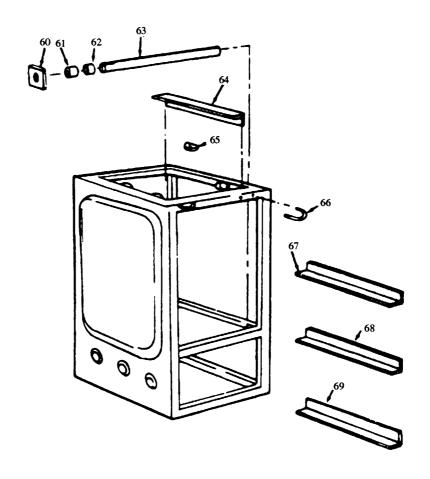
Figure D-l. Cabinet Assembly (Sheet 3 of 3)
